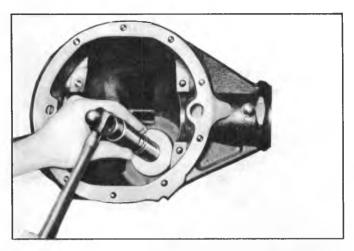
B-Drive Pinion Rear Bearing Cup Installation
